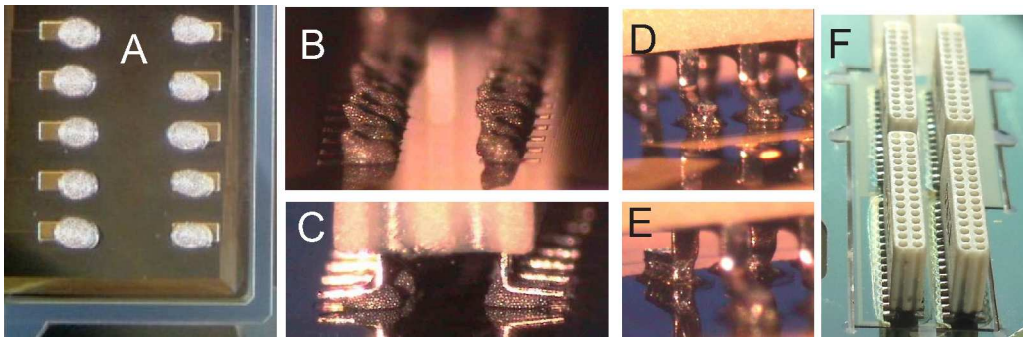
(A,B) The solder-paste dispensed slightly off-pad to ease connector alignment; Omnetics connector before (C) and after heating (D,E,F).
